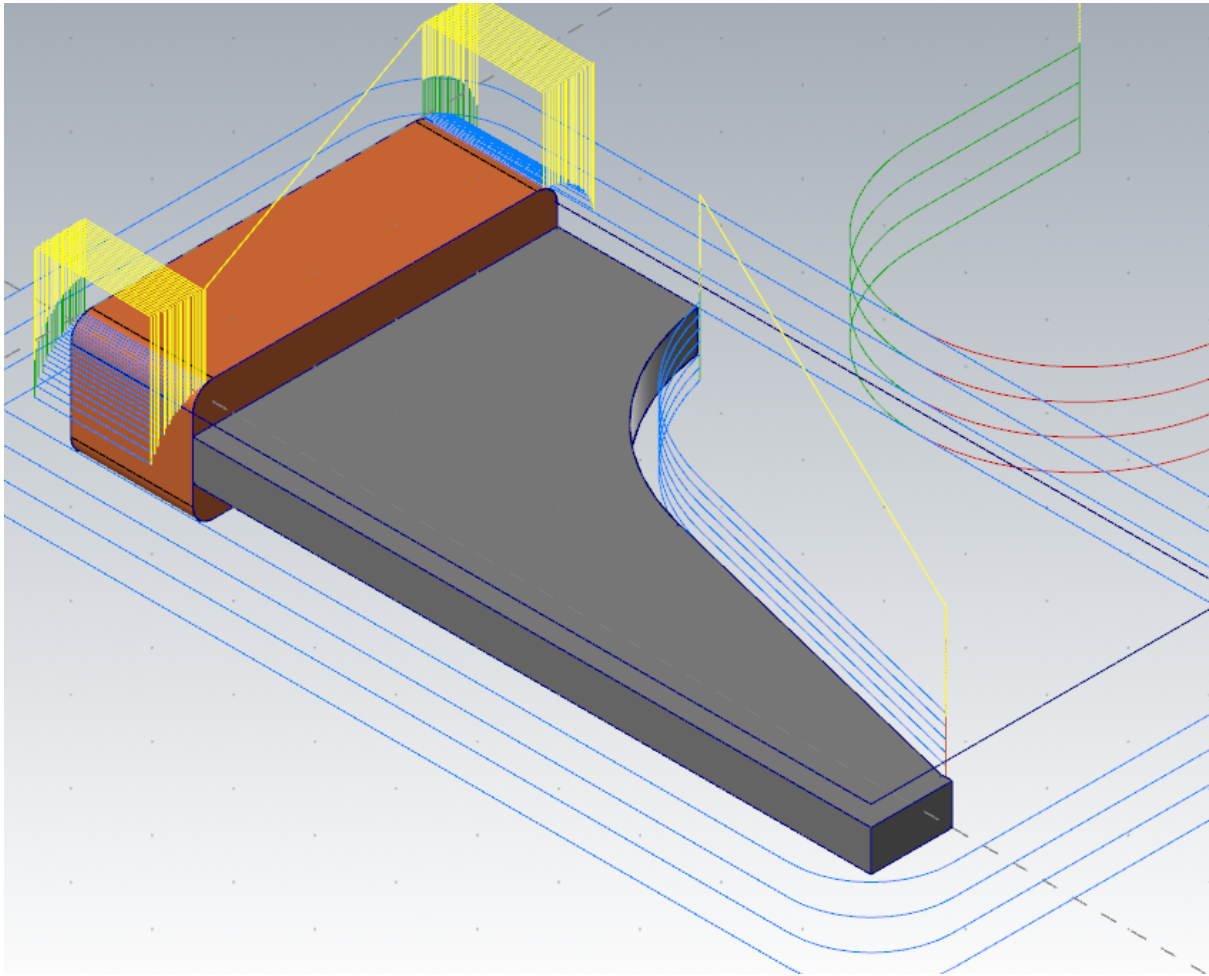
Injection Mold Stationary Half Tool Path
